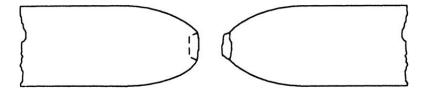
"Cup-and-Cone" Failure of a Mild Steel Test Piece
